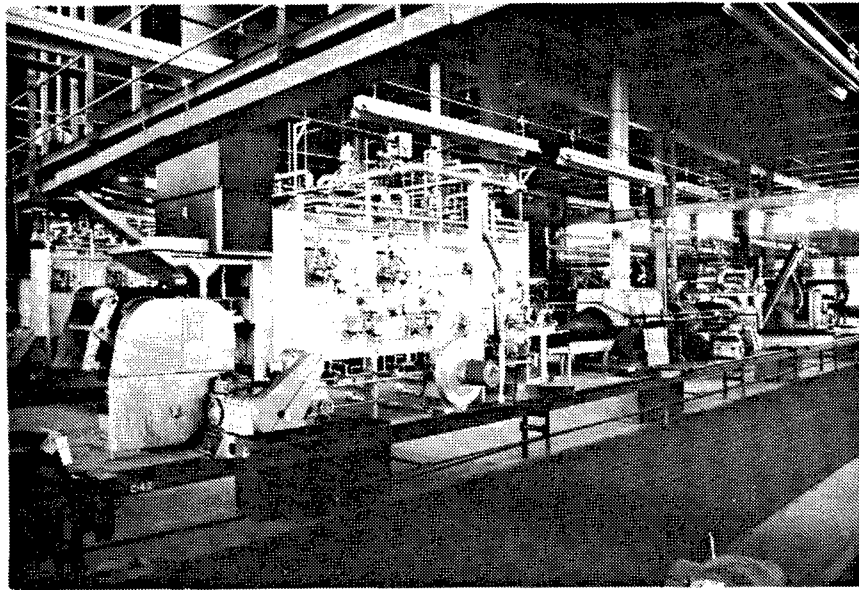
Building 102: Salem Furnace manufactured in 1951 by Salem Engineering.
